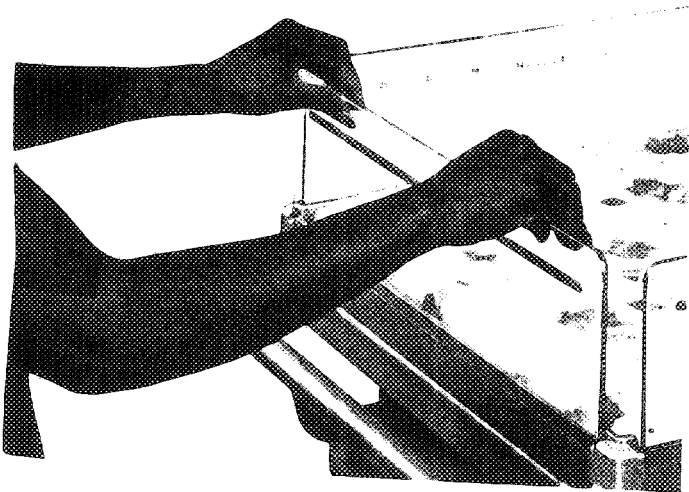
CHECKING THE BASSINET FRONT PANEL
